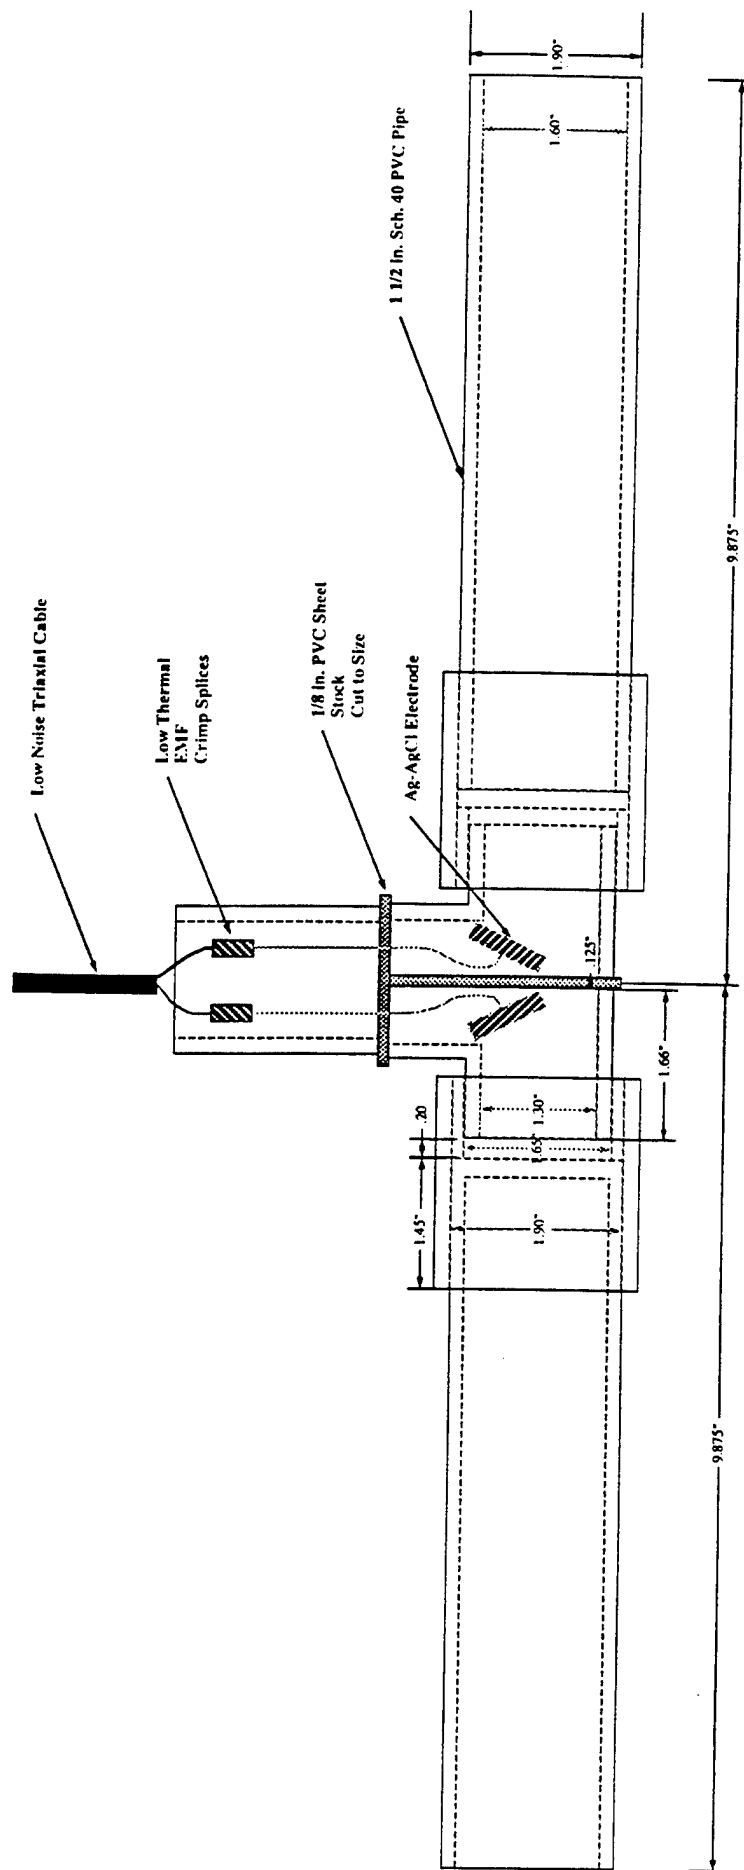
Side view of APL-UW sensor assembly showing internal arrangement of parts and dimensions. A piece of 1 in. PVC pipe was cemented to the stub end of the tee and used to support the sensor in the saltwater tank.
